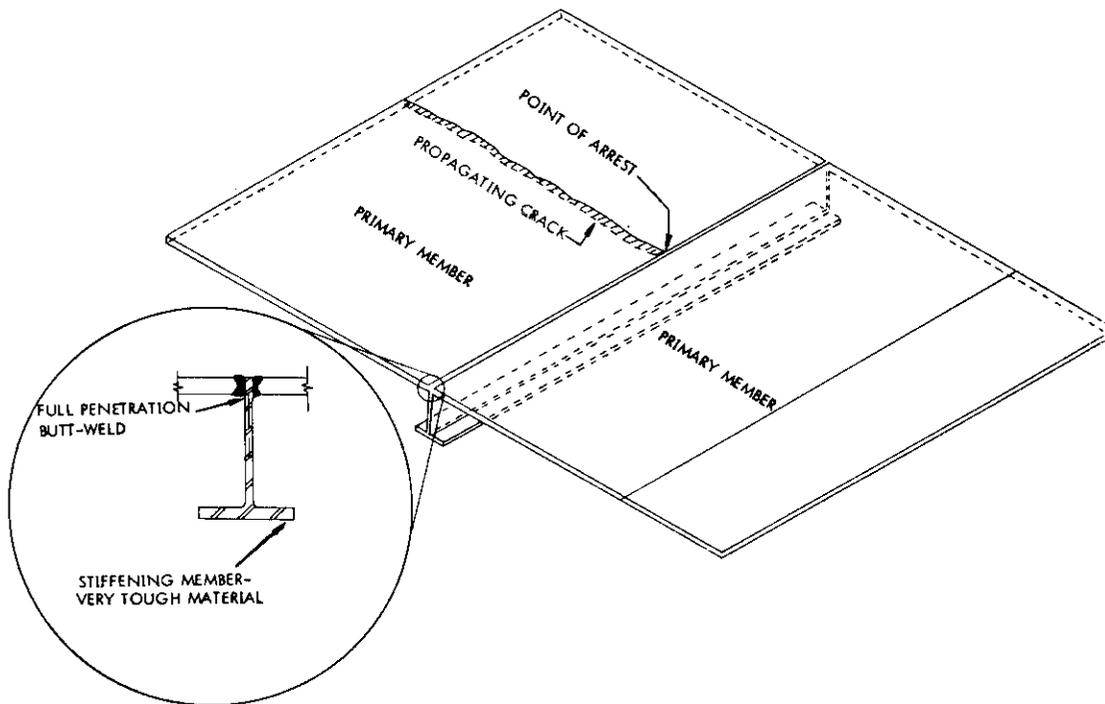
Schematic Showing Out-of Plane Crack Arrester
